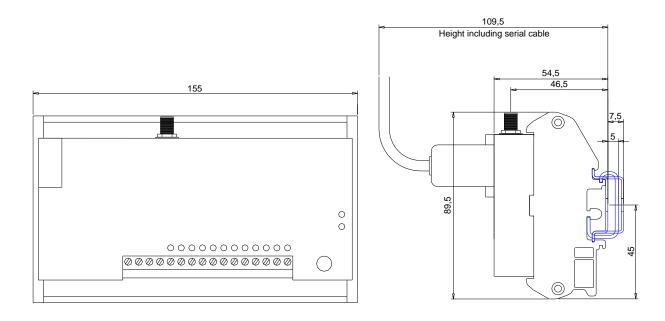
Mechanical Mounting Dimensions for the Teleterm M3.
